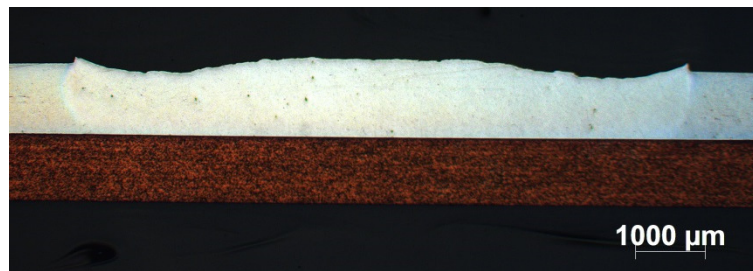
Friction spot weld of copper to aluminium EN-AW 1050 + Cu-ETP (Source: BWI)
